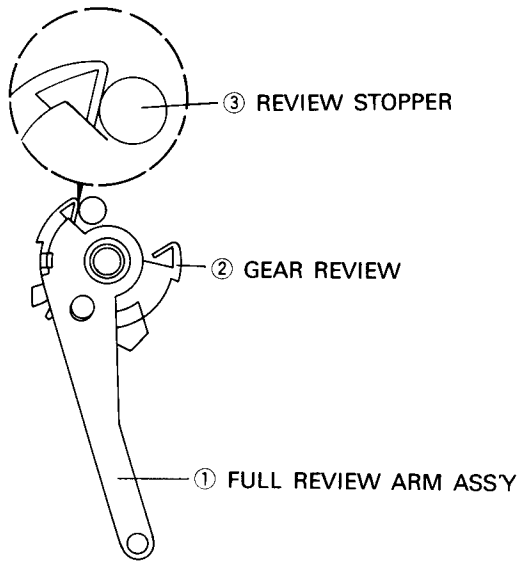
Reassembly and Timing of Full Review Arm Ass'y
